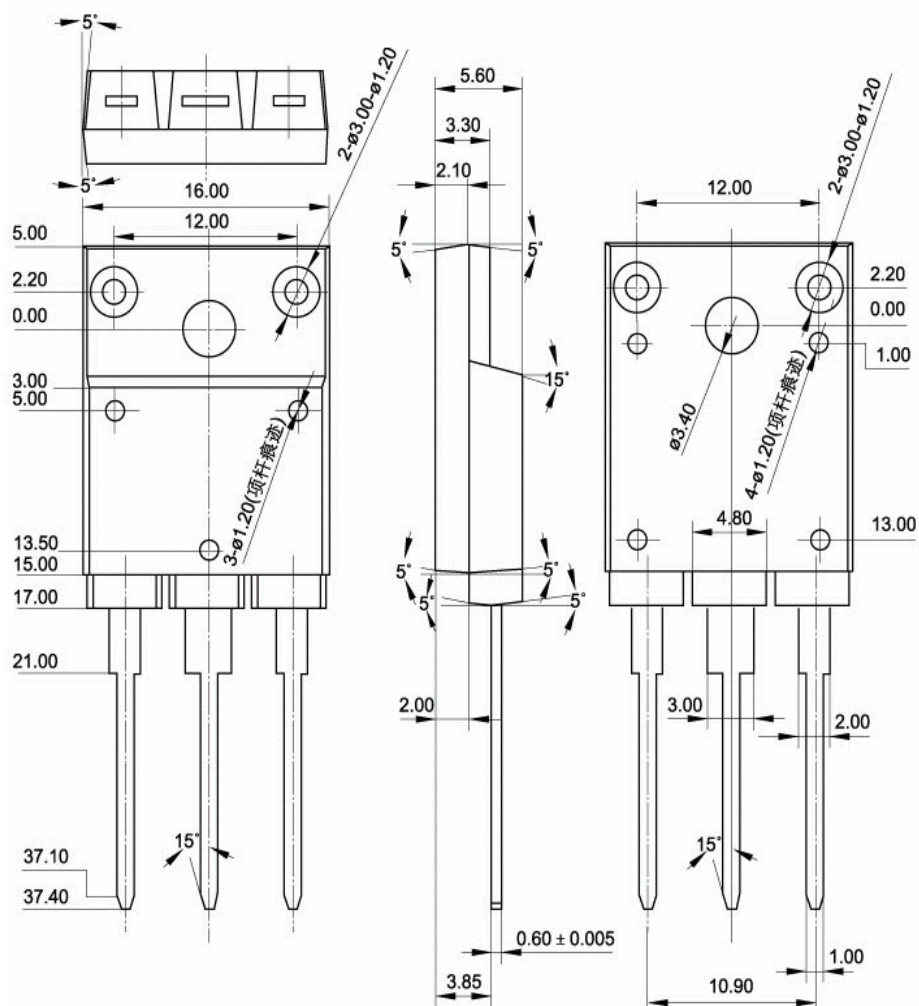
Outline dimensions (unindicated tolerance:±0.10 mm)
